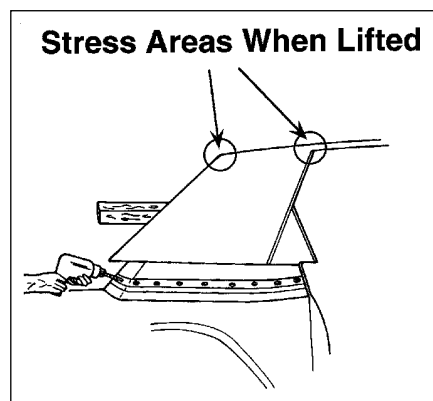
Replacing of the quarter panel requires cutting the SMC roof panel adhesive and holding the panel up with a block of wood to reveal the spot weld locations. The roof shouldn't be lifted too high, as it can be damaged at the two areas shown.
